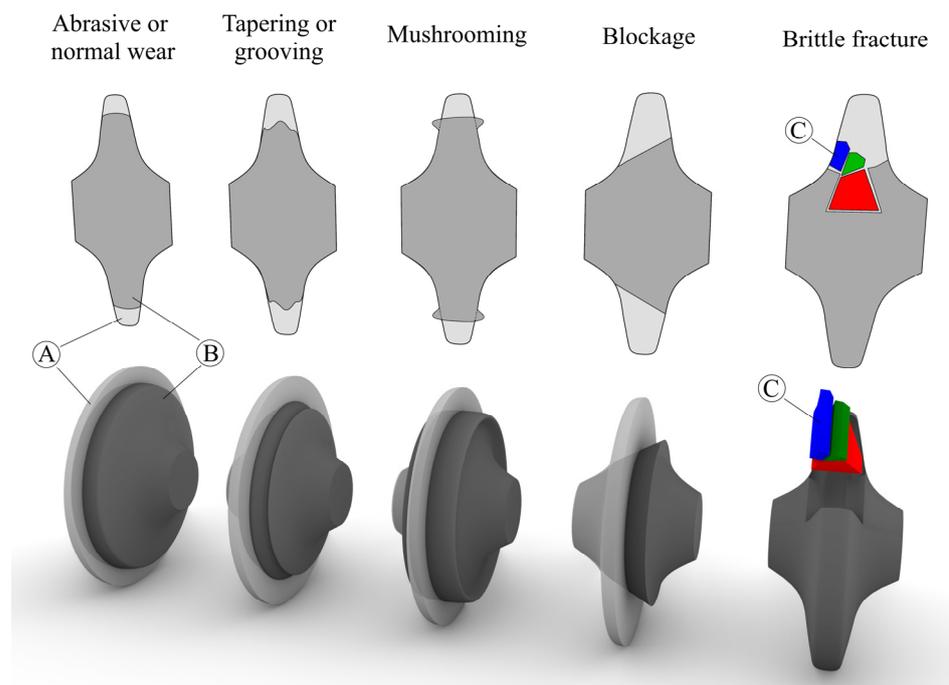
Five types of basic disc cutter wear. A and B indicate new (light grey color) and worn disc cutter rings (dark grey color), respectively. C indicates a broken part of the cutter ring due to a brittle fracture. In the lower part of the illustration, only half of the new light-grey-colored cutter ring tip is shown to make the worn cutter ring more visible (adapted from [34]).
